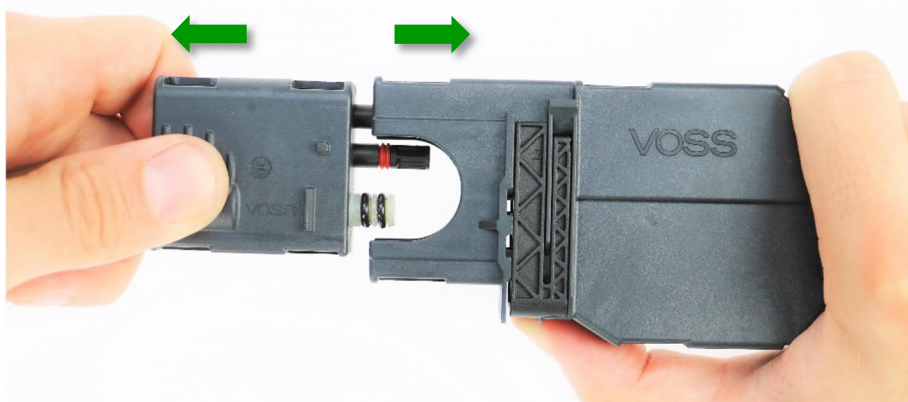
Separation of plug and coupling side of manifold 301 *EFSM
